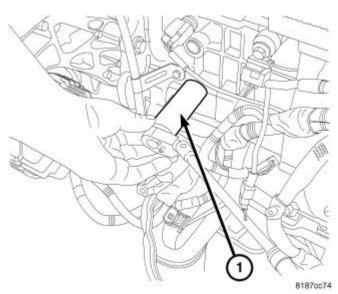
Oil Filter Housing & Bolts Courtesy of CHRYSLER GROUP, LLC
